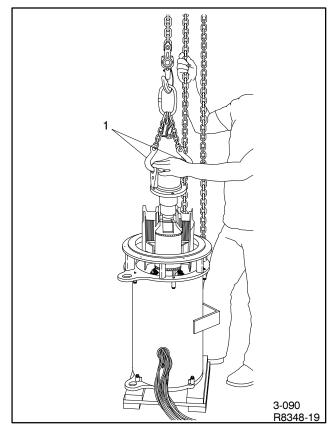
Generator Support, Drive Disc and Fan Removal
